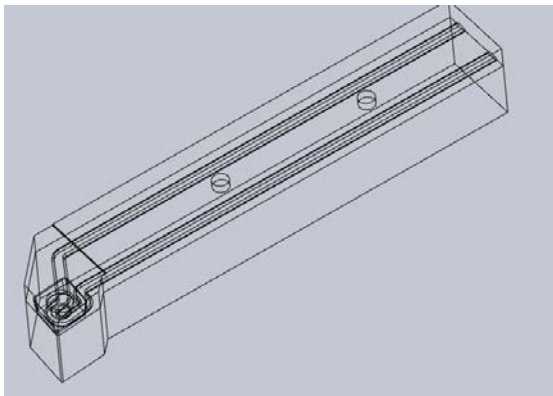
Internally cooled tool with cooling channels built into the tool holder.
